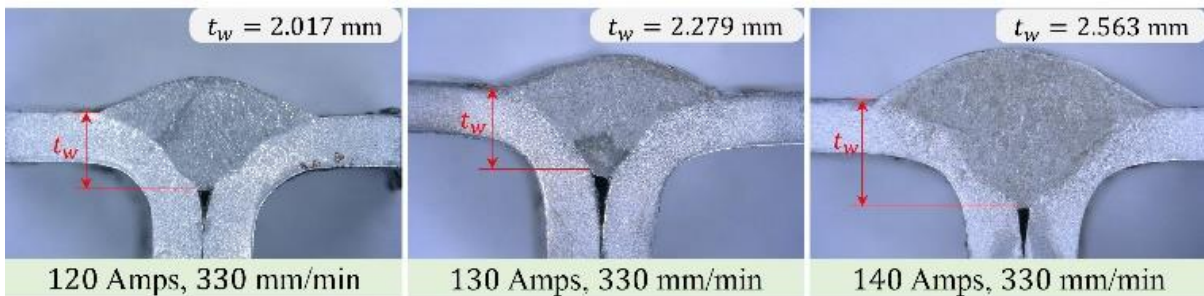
Macroscopic images of calibrated welding parameters
